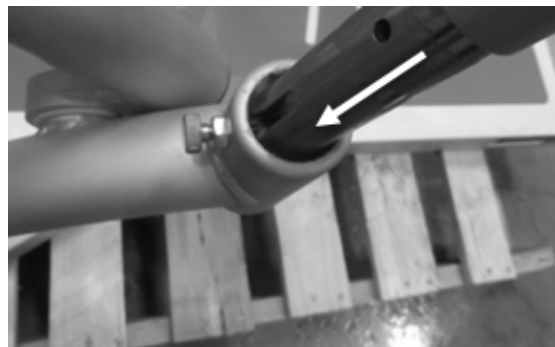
Align Plunger with Handle Groove, Insert Handle Assembly, and Tighten Screw.
